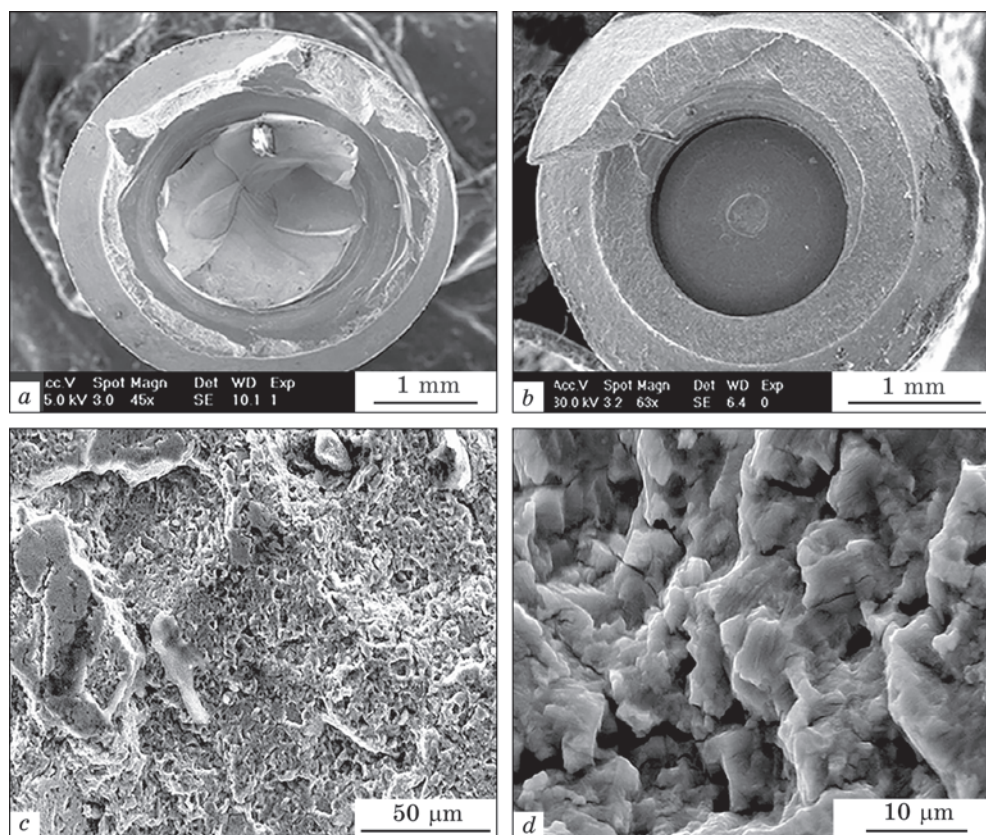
Macrographic images of retrieved dental implants made of (a) c.p. Ti and (b) Ti-6Al-4V. (c) Final fracture in c.p. Ti dental implants: dimples from retrieved implant. (d) Fracture surface topography of Ti-6Al-4V dental implants: fractography taken from retrieved implants. Adopted from Ref. [56]
